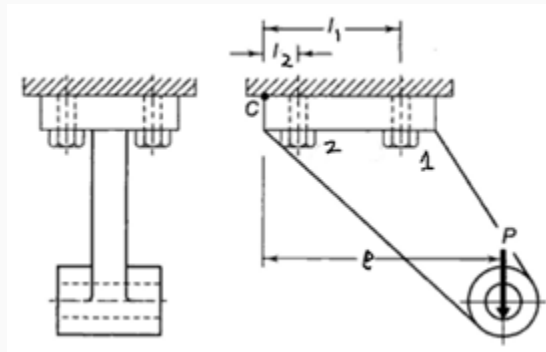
Eccentric load acting parallel to the plane of bolts
